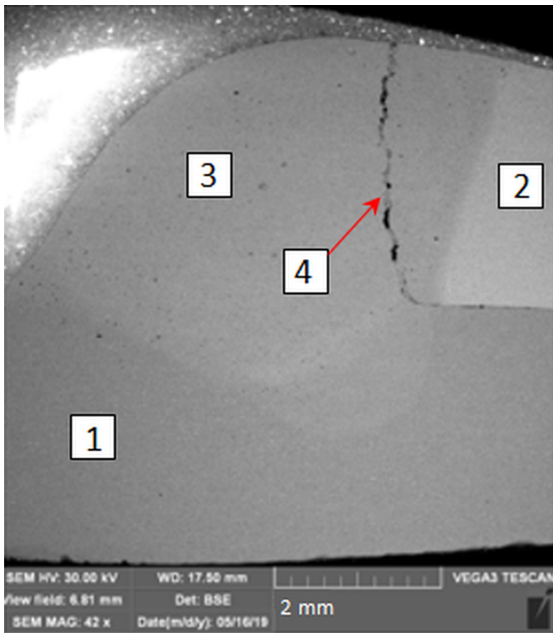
Exemplary fracture of a Z7-1 type overlap joint after tensile test: 1 – EN AW-6082, 2 – EN AW-7075, 3 – weld, 4 – crack in the weld
